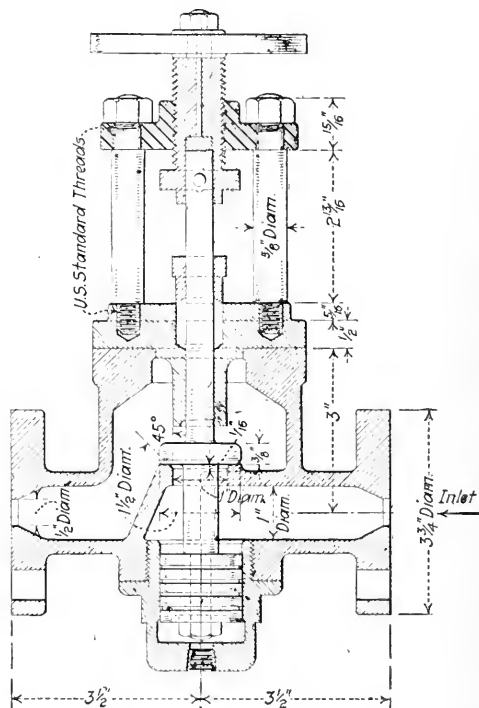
TYPE OF VALVE USED IN CONTROLLING FUEL-OIL PUMP
